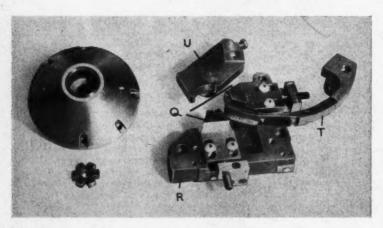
Typical tooling elements for the Heald 190A machines, shown separately for clarity. The magnetic driver is seen at upper left, and immediately below it, the carbide-tipped plug-gauge
